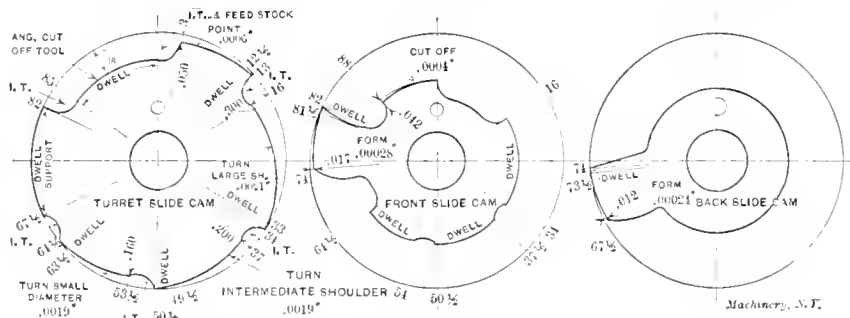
Turret and Cross Slide Cams used for Making the Staff shown in Fig. 2.
